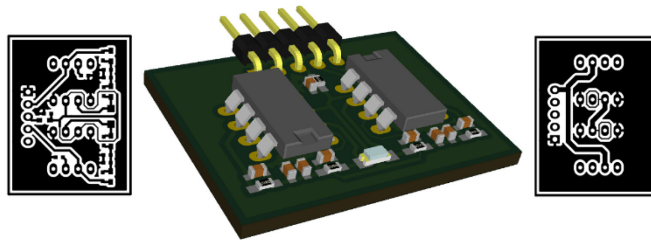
3D model of DUT (center), PCB front (left) and back (right) layer masks.
